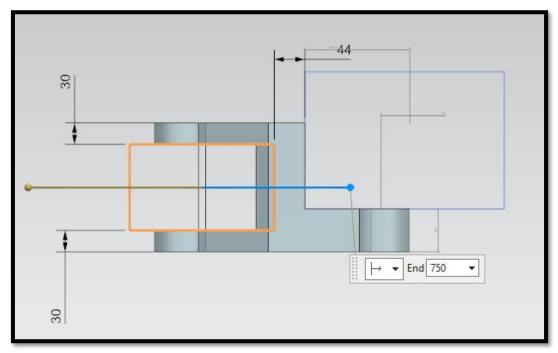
Sketches from the top view are highlighted and after which extrude cut was performed separately for the sketches shown
